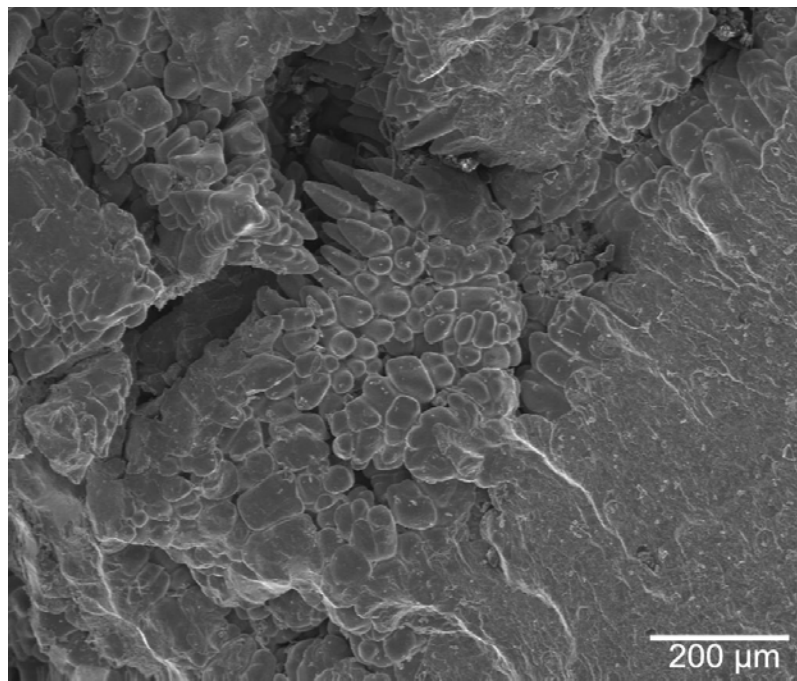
Extensive Dendrite Formation on Straight Cylinder Specimen Fracture Surface, $S_a = 392$ MPa (Specimen G7)
